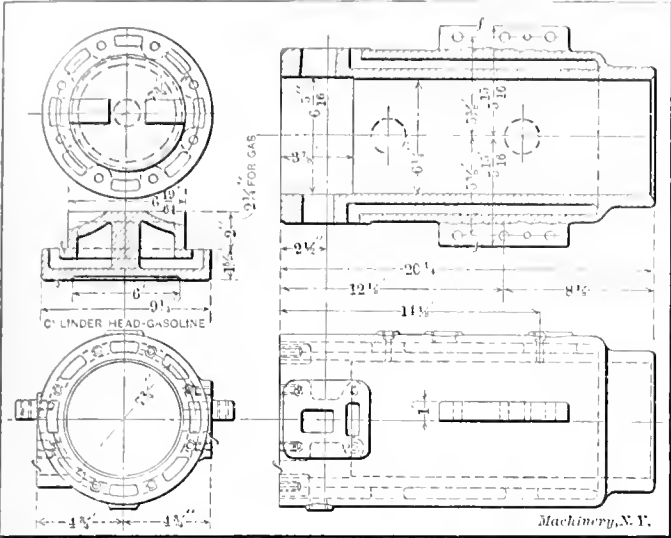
Detail of a 6 1/4 by 8 Gas Engine Cylinder
